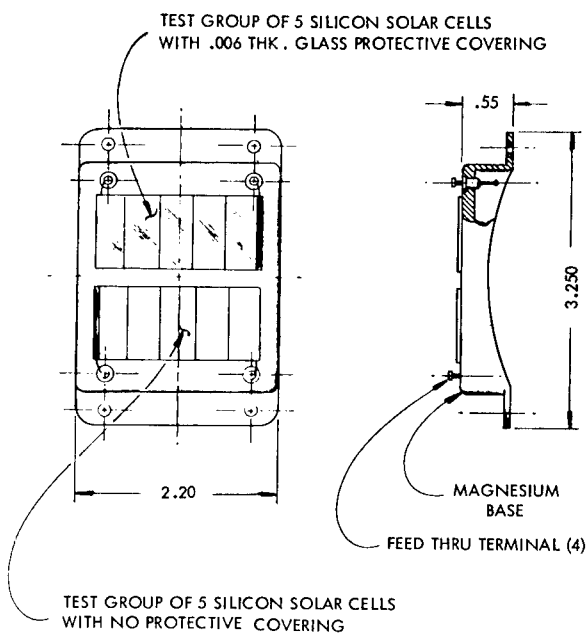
Double solar-cell test unit. All dimensions in inches.
